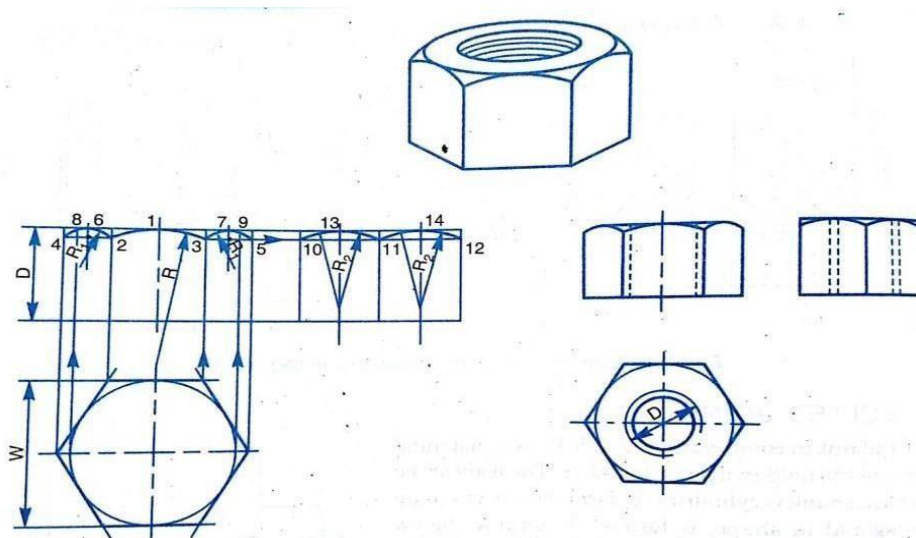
Method of drawing views of a hexagonal nut (Method I)
